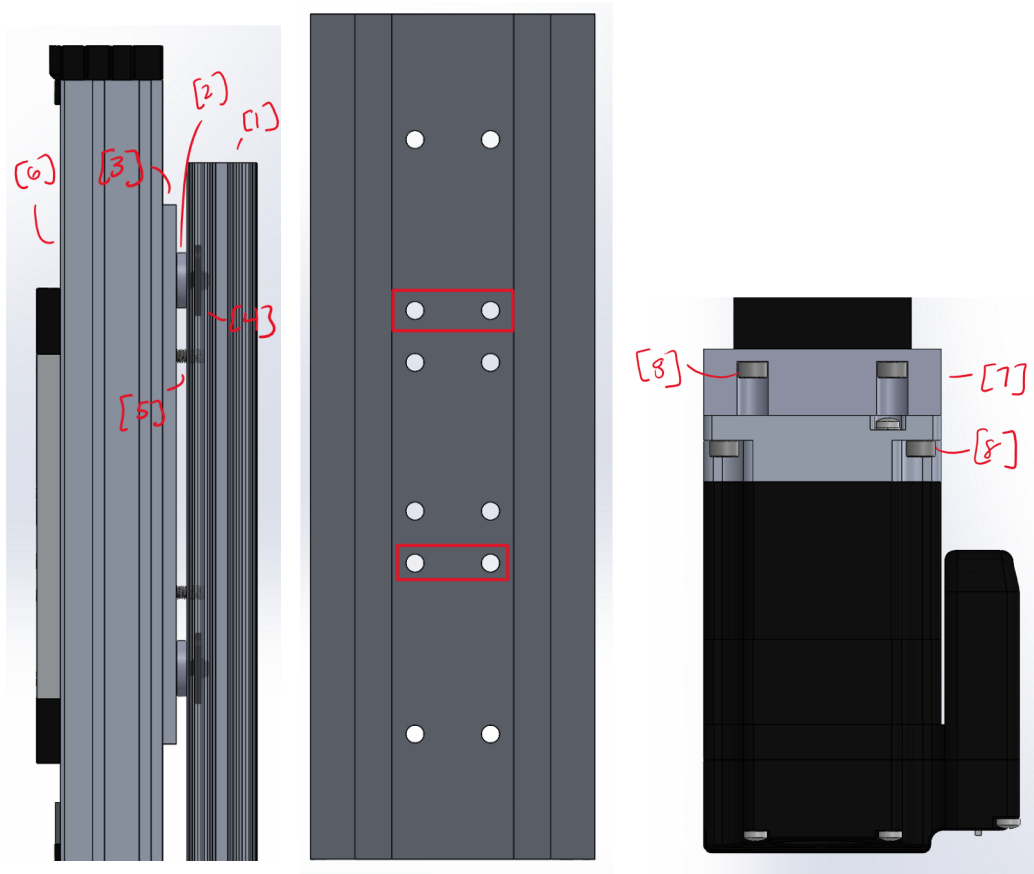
Ball-Screw Actuator Assembly of Physical Prototype.
